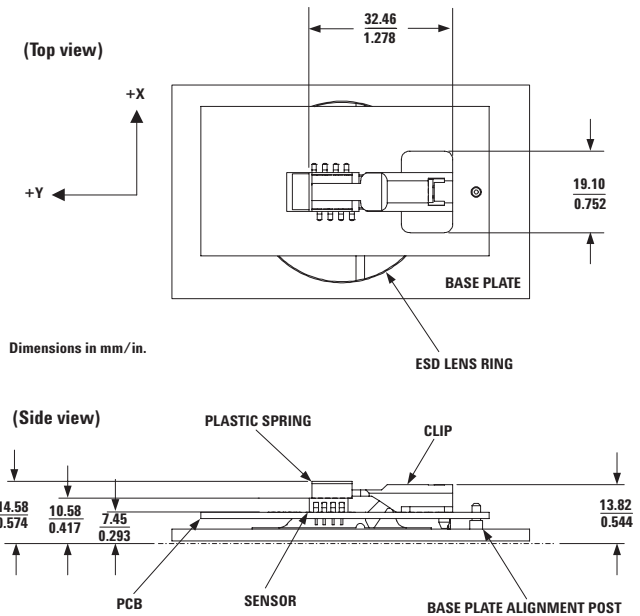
2D assembly drawing of ADNS-2620 shown with the HLMP-ED80 (top and side view).
